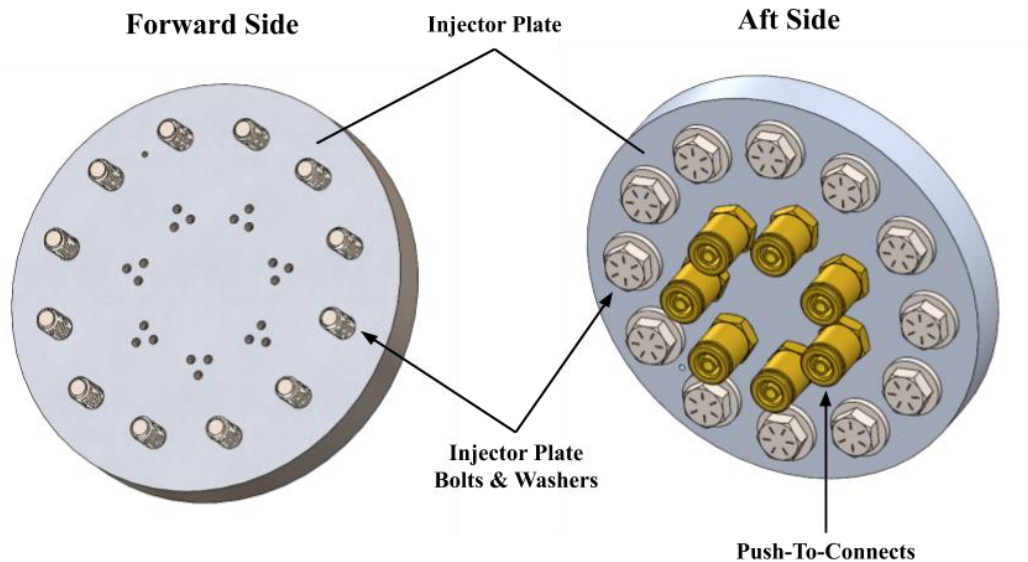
Injector Plate Assembly (forward & aft views, labeled)
